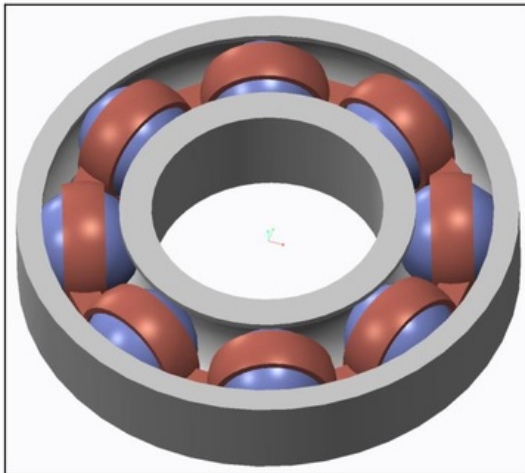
SKF 6306-2Z single row deep groove ball bearing model
